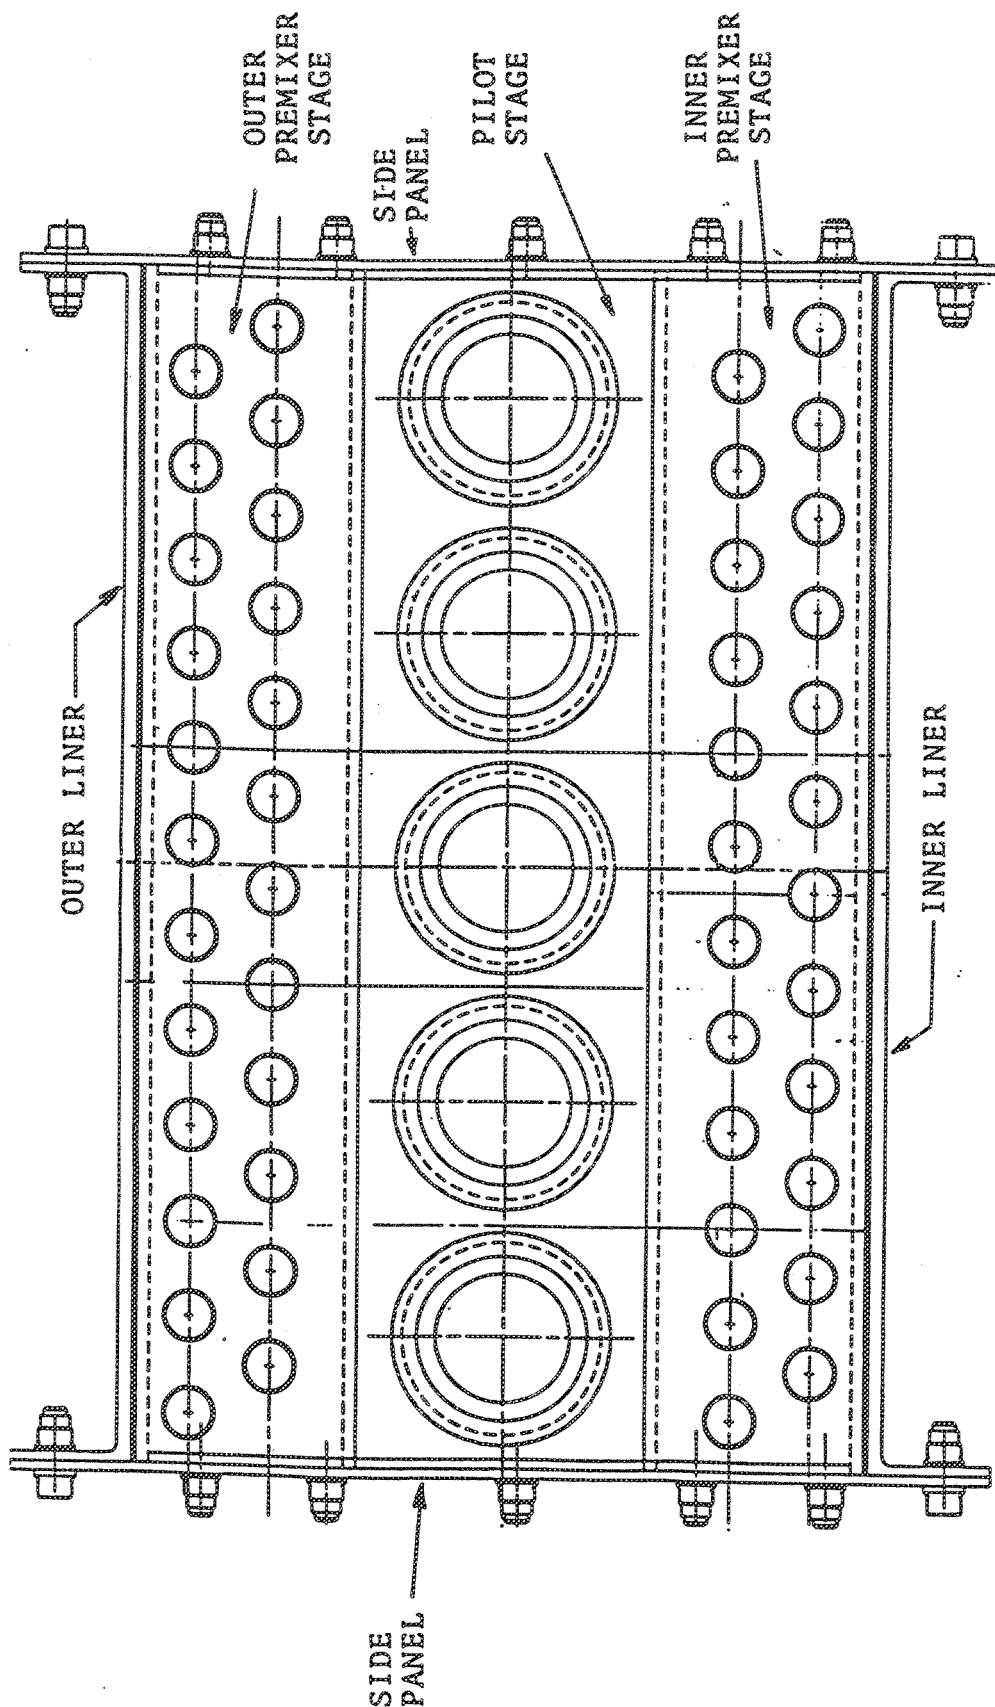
End View (ALF) IMFH/Cyclone Sector Combustor.
